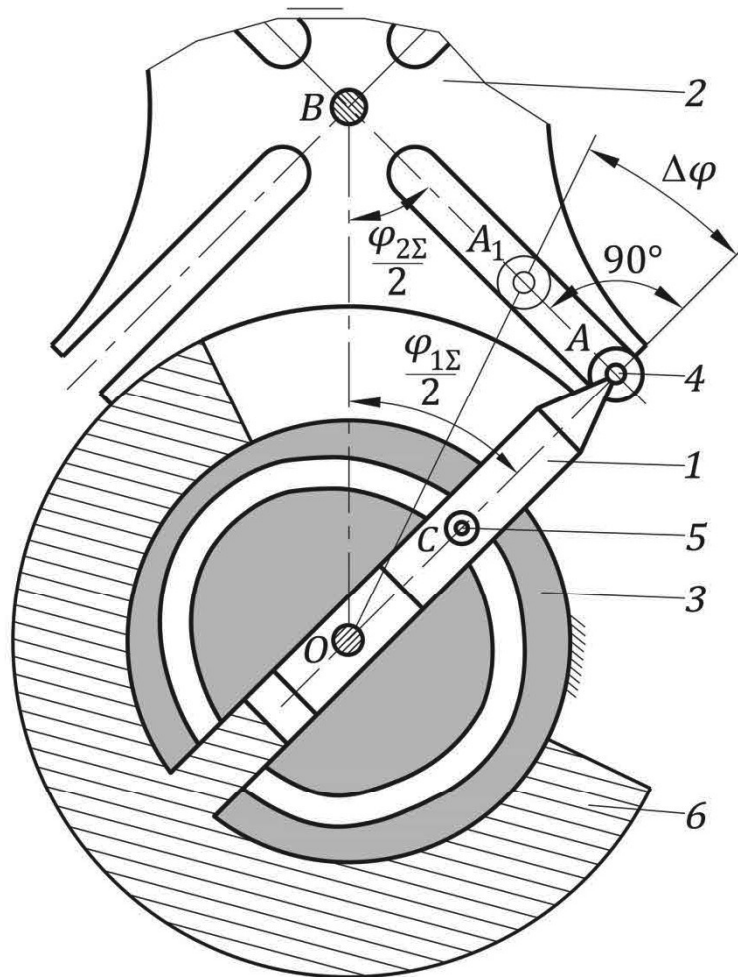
Detailed schematic of the groove cam Geneva mechanism: input crank 1, output wheel 2, groove cam 3, driving pin 4 and roller follower 5, locking ring 6
